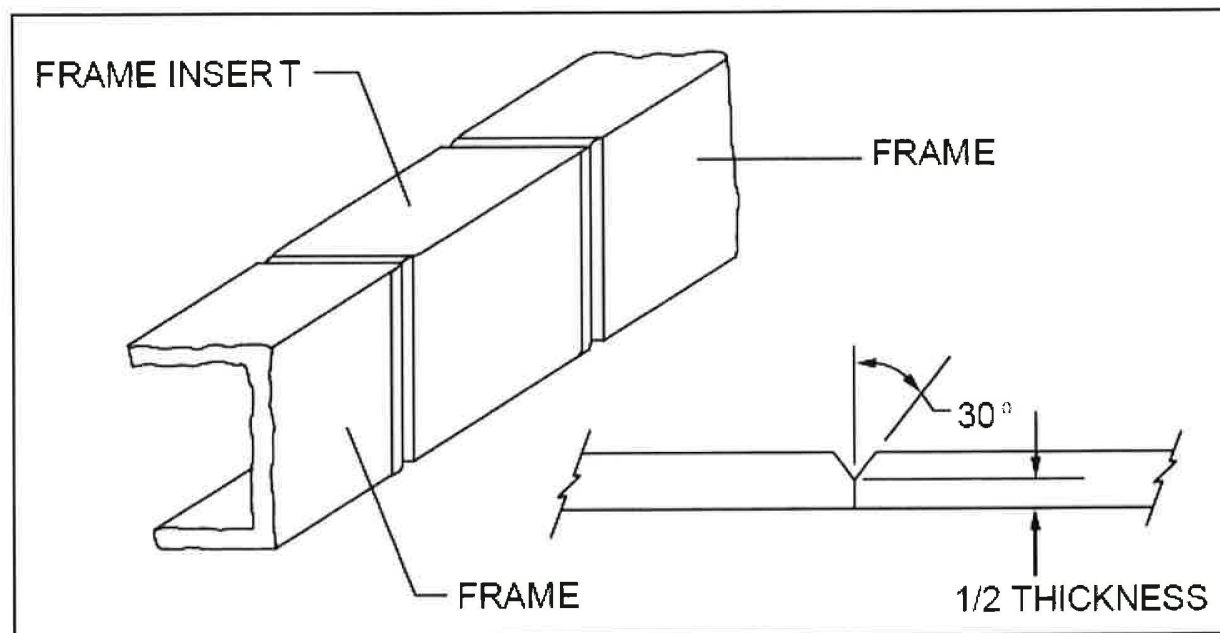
Chamfered Frame Rails Prior to Welding
